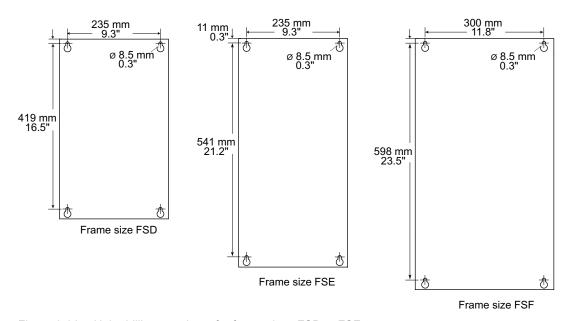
Hole drilling templates for frame sizes FSD to FSF
